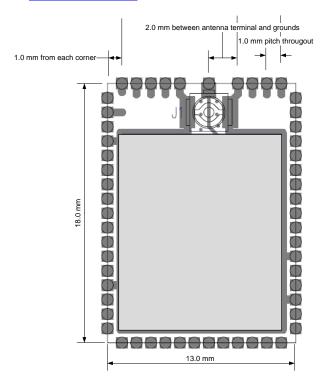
Module Mechanical Dimensions (Maximum Module Height = 1.9 mm)
